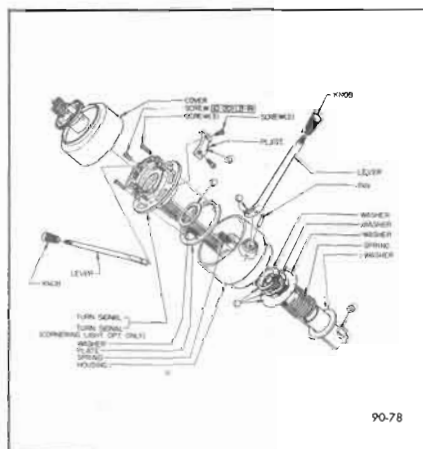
Disassembly of Upper Portion of Automatic Transmission Mast Jacket (45-46-48000 Series)
